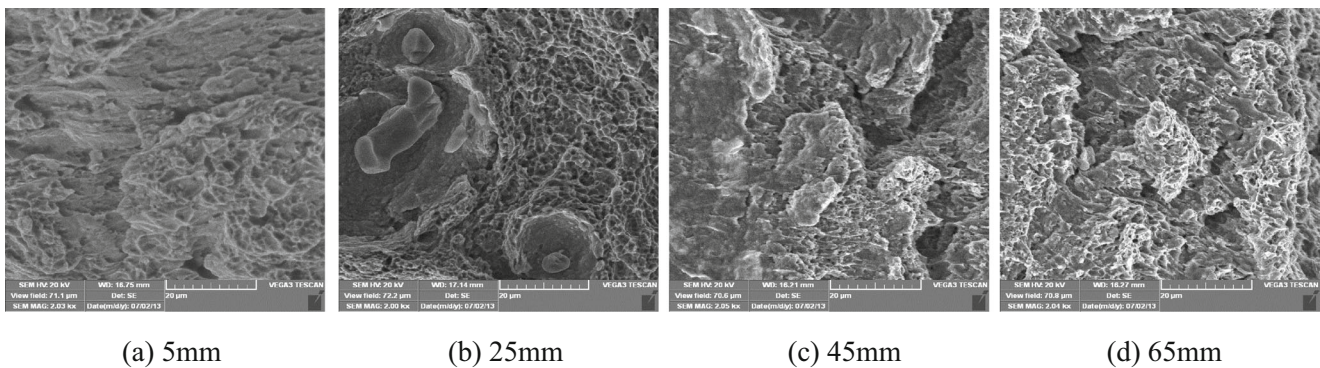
Appearance of fracture of different distances off the weld area after forging. a 5 mm. b 25 mm. c 45 mm. d 65 mm
